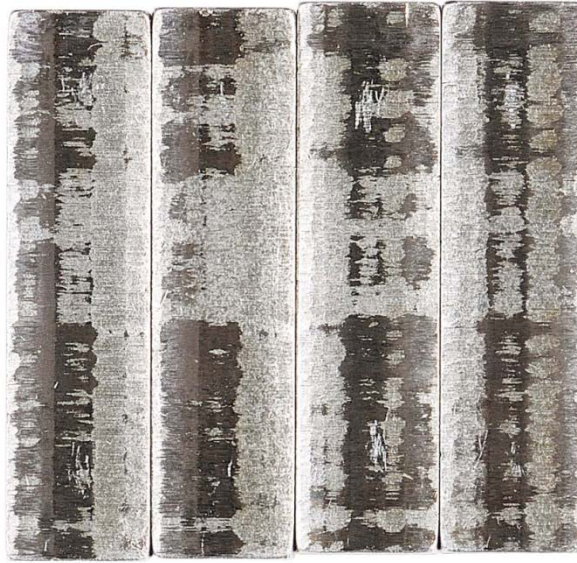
Pump SN: 16393231 Transfer Pump Blade Edges with 139-Hours Testing with JP-8 Fuel
